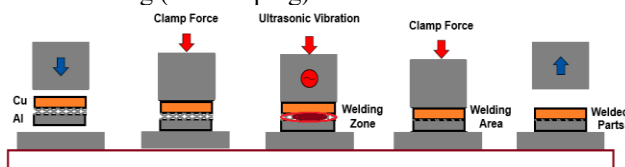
Steps of Welding process during operation of USW at interface of the joined materials
